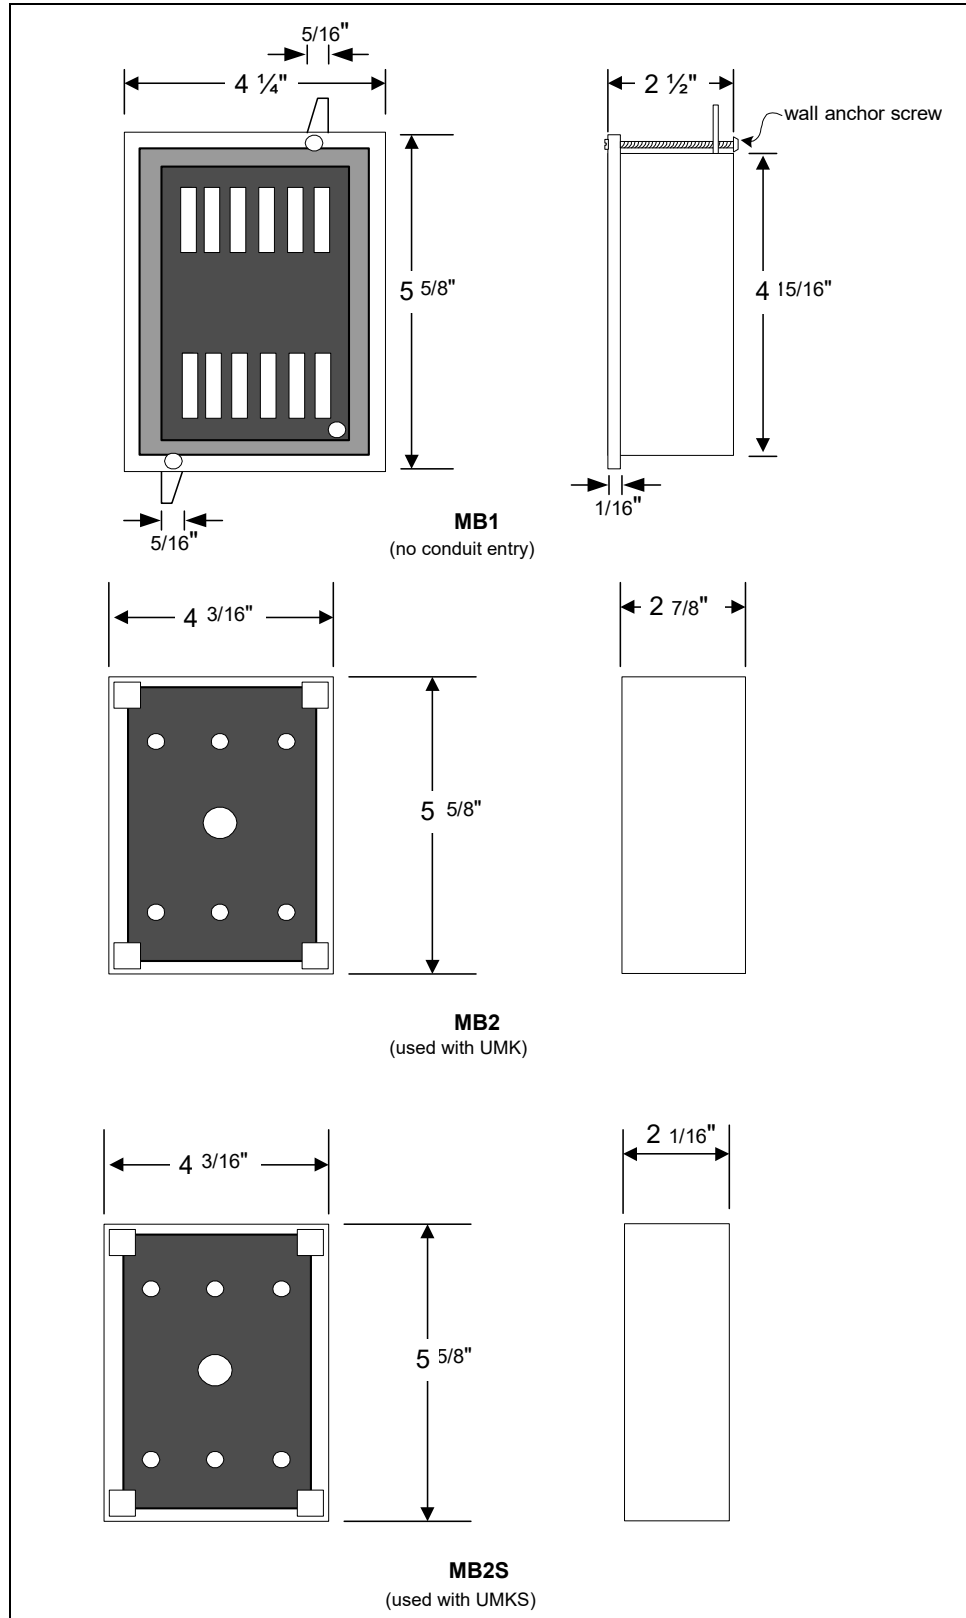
ScramblePad Mounting Boxes Dimensions - MB1, MB2, & MB2S
